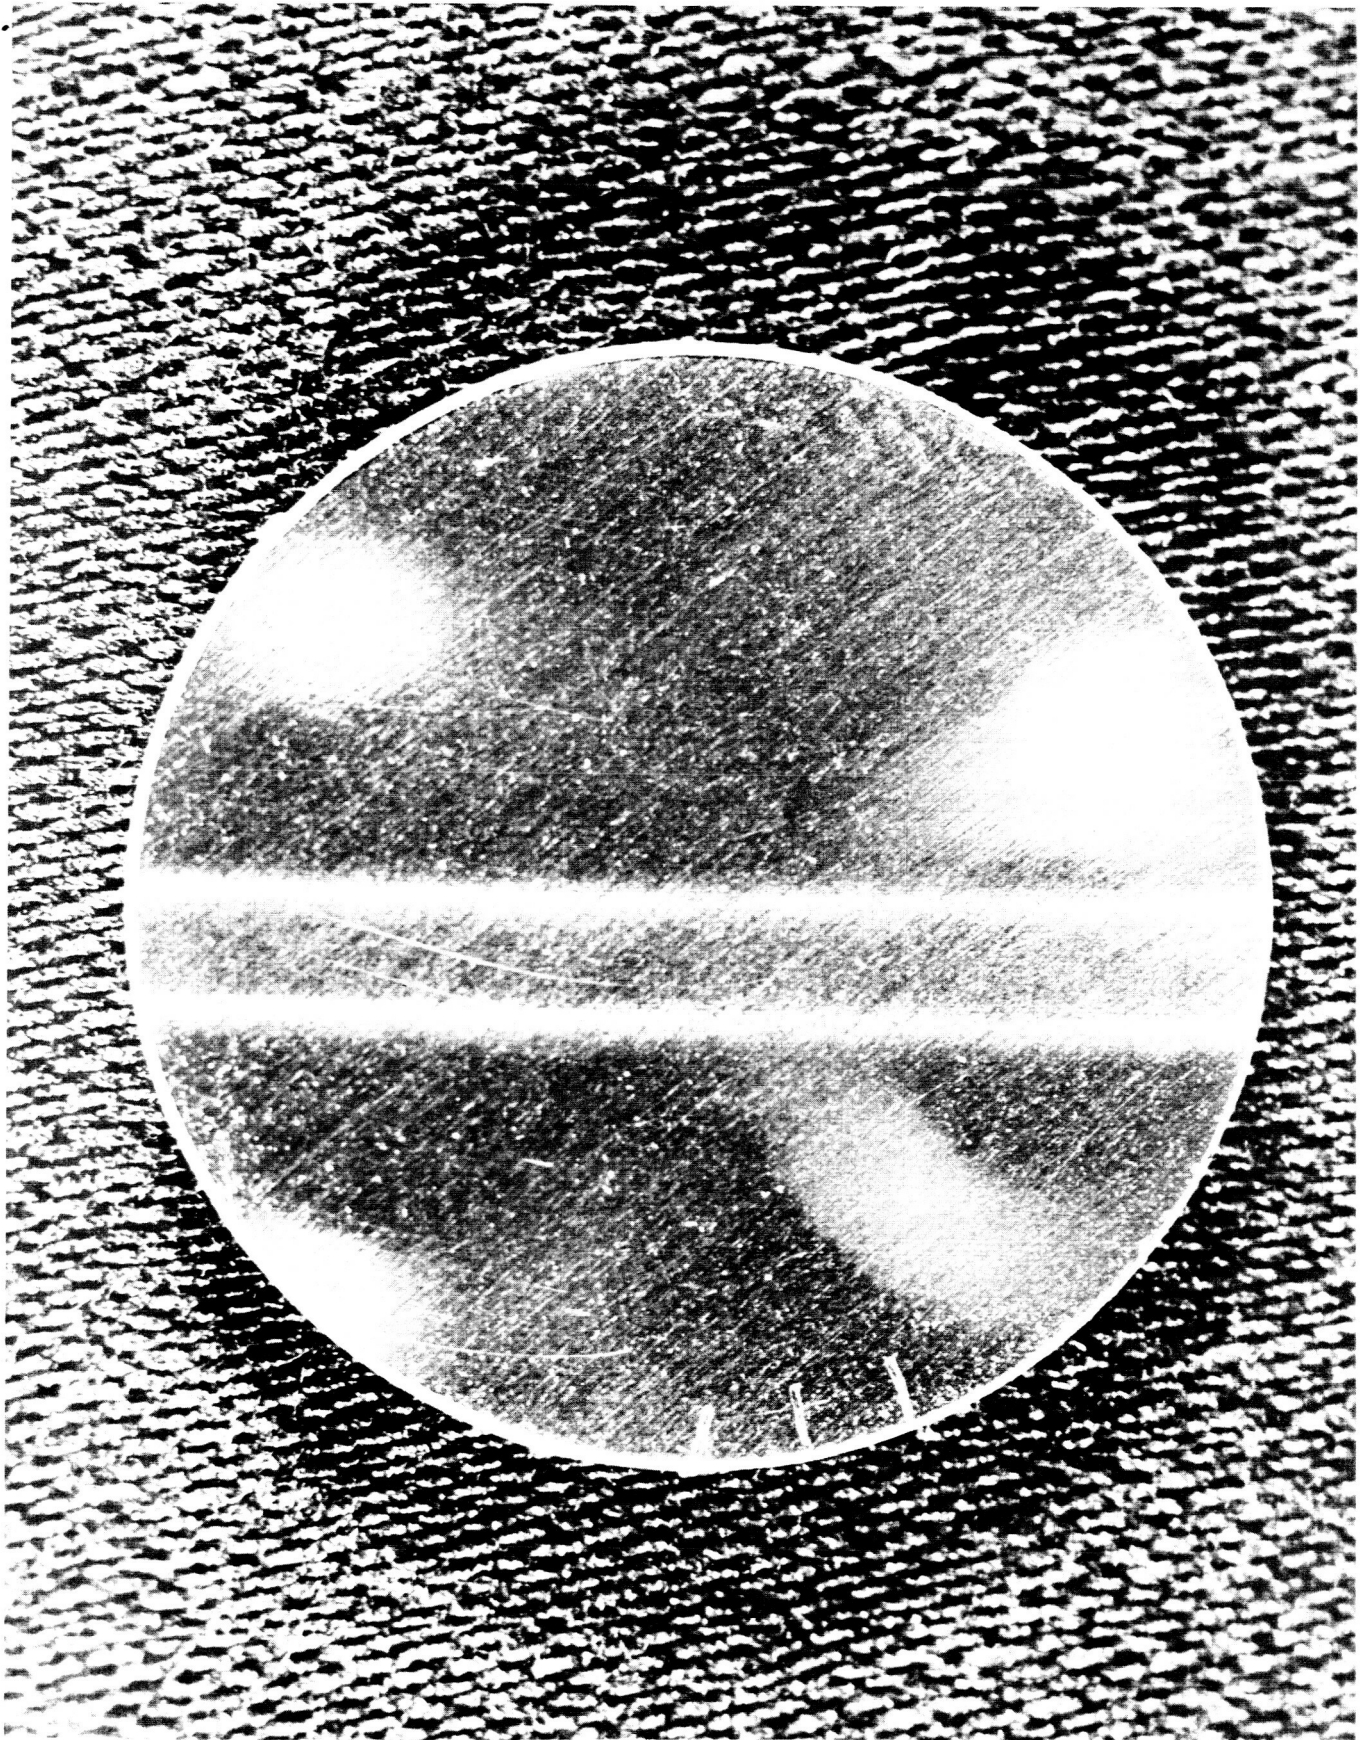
MACRO-PHOTO BLISTERS ON 6061-T6 SHEET
